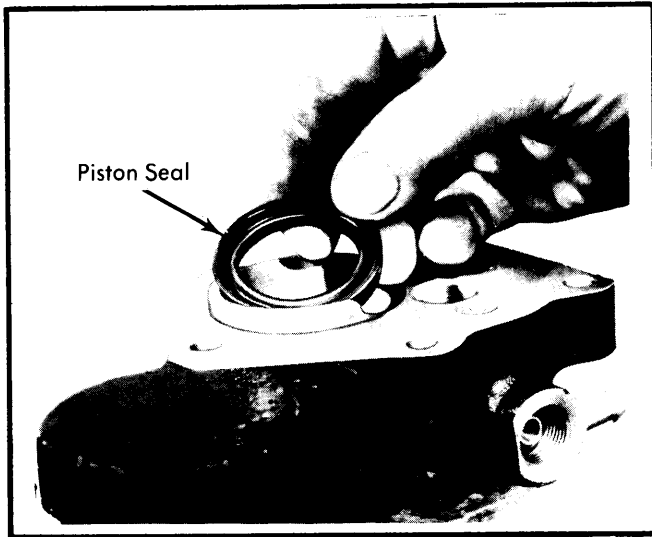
Installing New Power Piston Seal into Rear Housing (Cadillac Shown)
